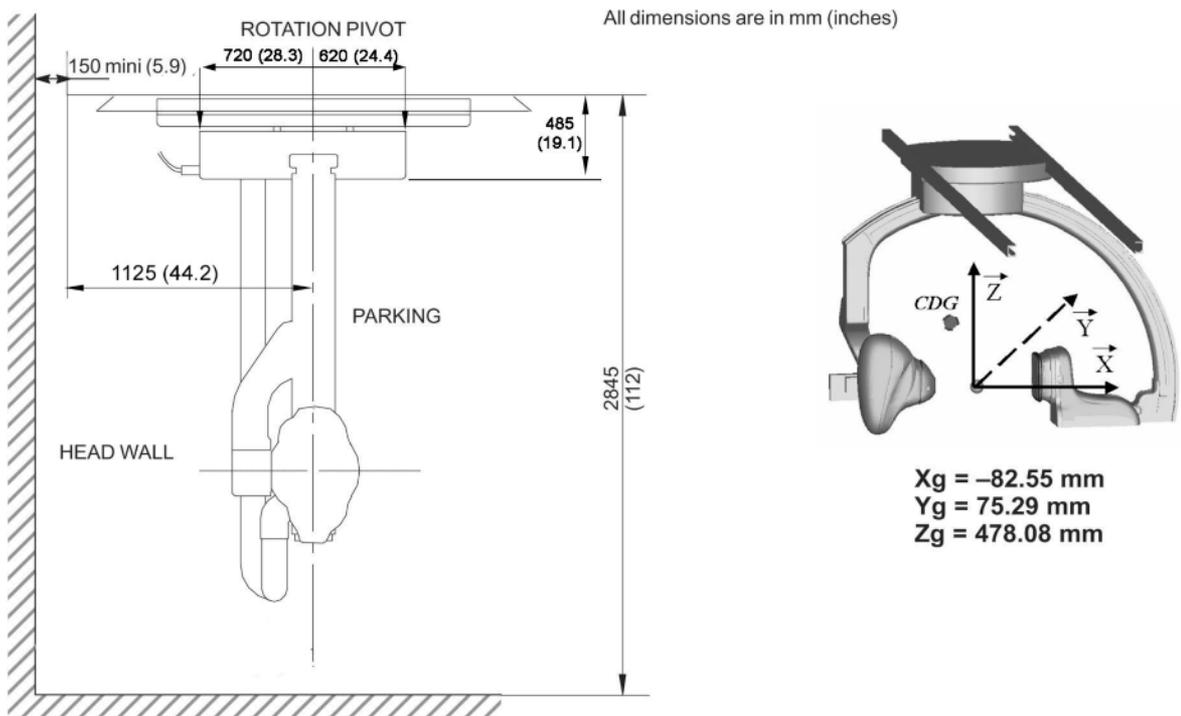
Innova LP4 Positioner Dimensions - Top View
